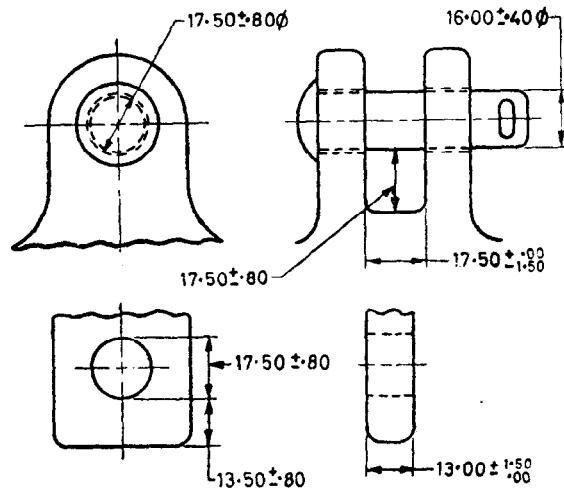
SLIDING POSITION OF THE PIN BALL IN THE SOCKET END
